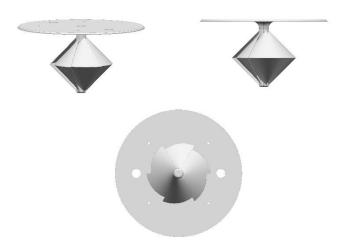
Gas diffuser to be printed using metal additive manufacturing process @Sirius Space Services
